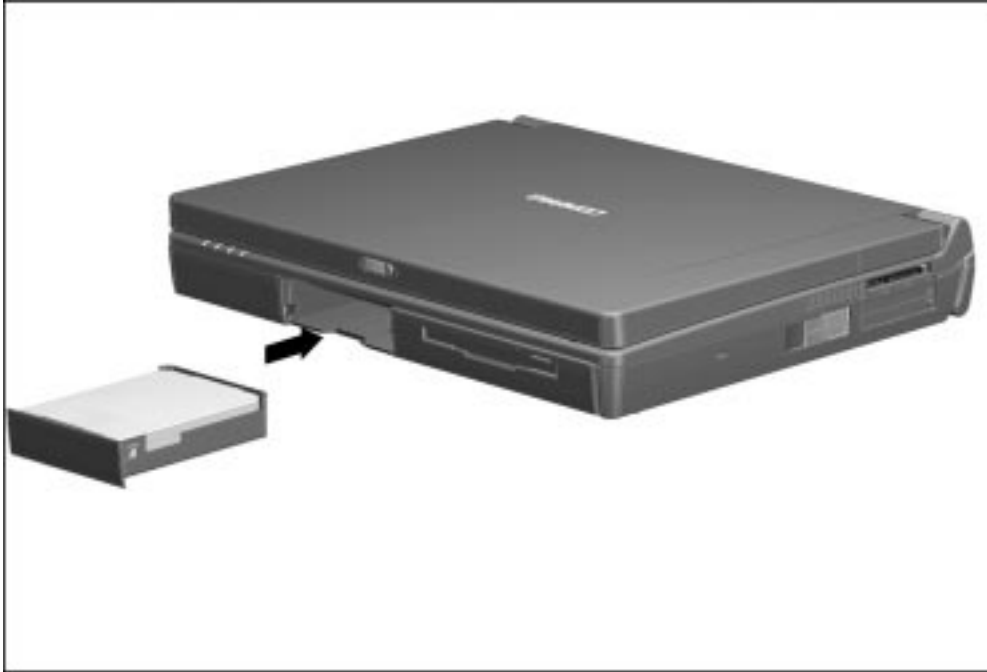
Inserting a Hard Drive into the Hard Drive Bay
